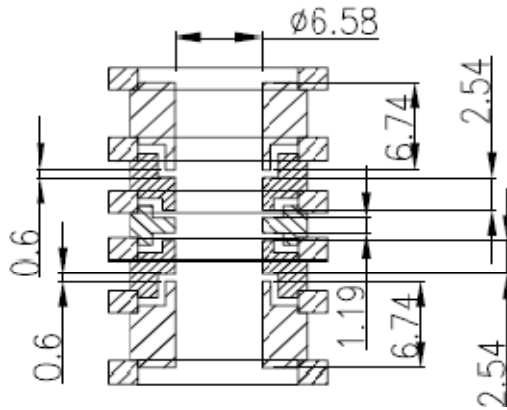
Electrode assembly of trapping zone with MACOR spacers machined at VECC.
